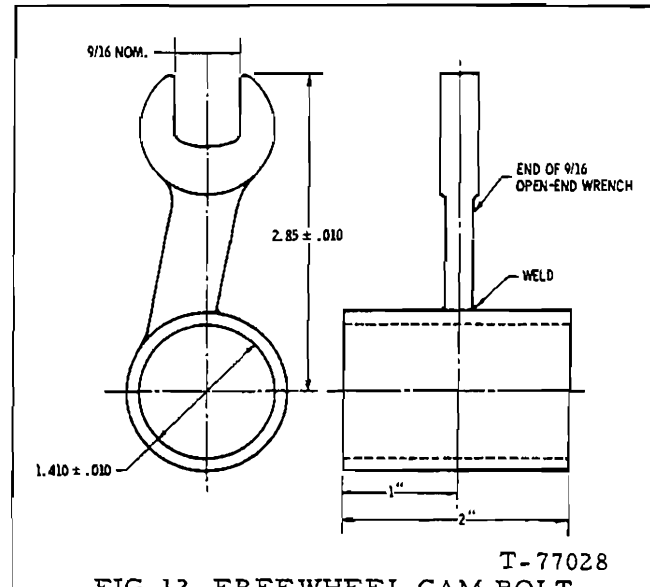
FREEWHEEL CAM BOLT HOLDING FIXTURE
